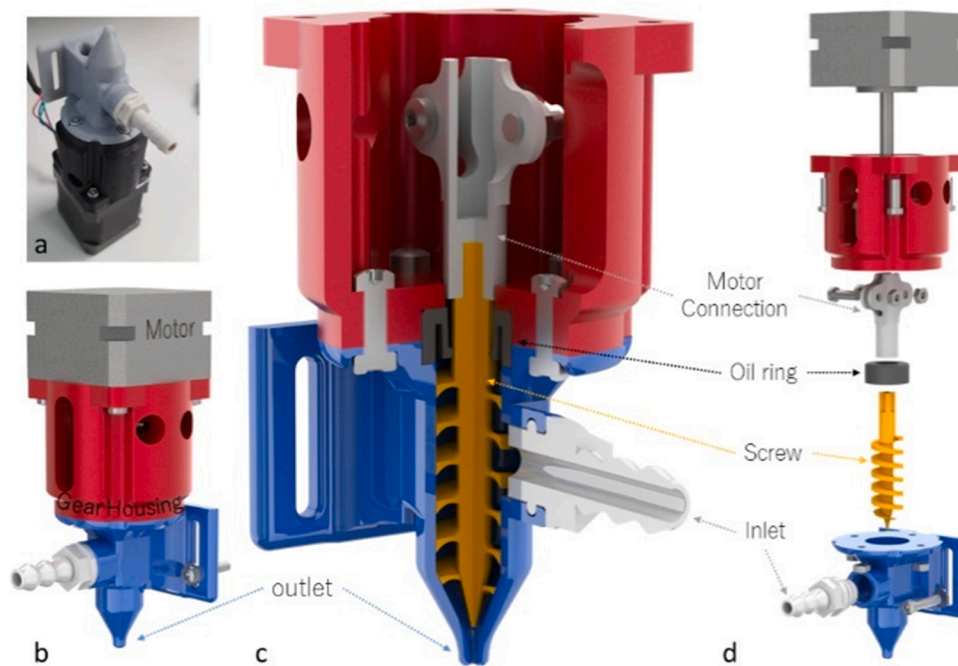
a) Fully assembled SDS. b) Assembly CAD design. c) Cross-sectional view of the subsystem. d) Exploded view of the subsystem.
